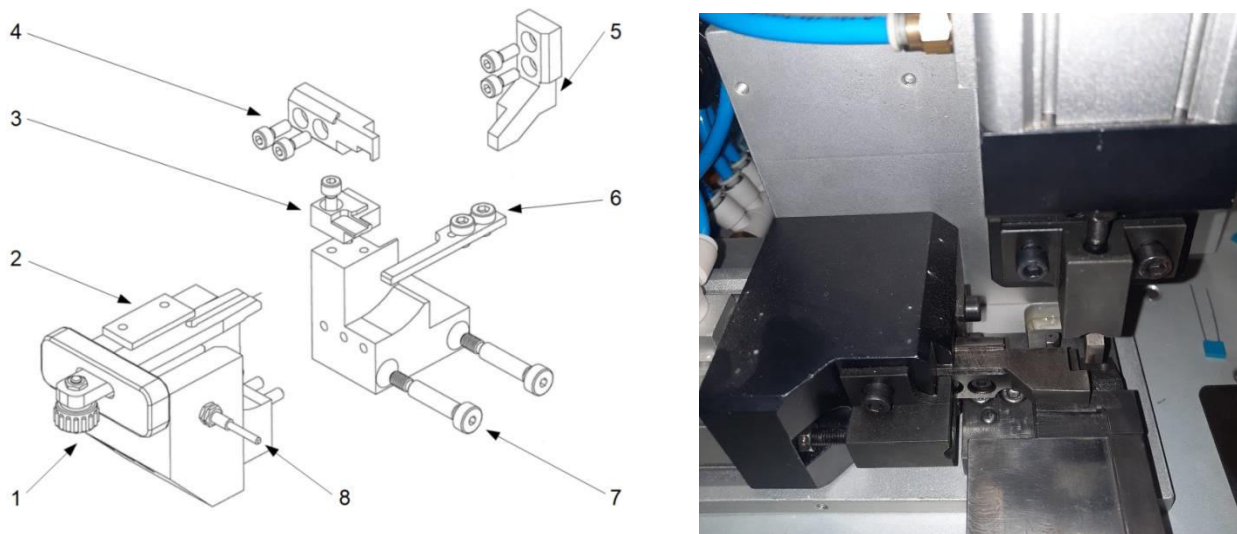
The mechanical system of the folding-cutting equipment [18]: 1 - support; 2 - guide plug; 3 - matrix; 4 - bending profile at a 90° angle; 5 - cutter for folding and cutting excess material; 6 - cutter for folding at an angle of 180° ; 7 - profiled support for microdeformation; 8 - stud bolt.
